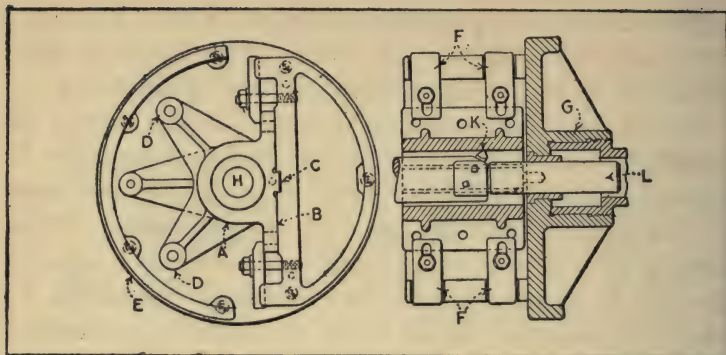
PLAN AND SECTION OF A FIXTURE WITH SAFEGUARDING DEVICES
